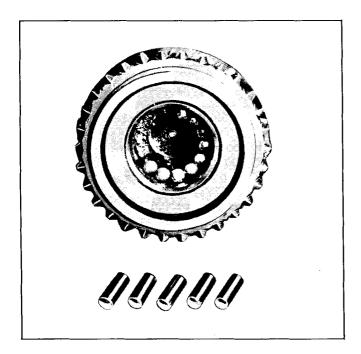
A-33 Loading Rollers Into Main Drive Gear
